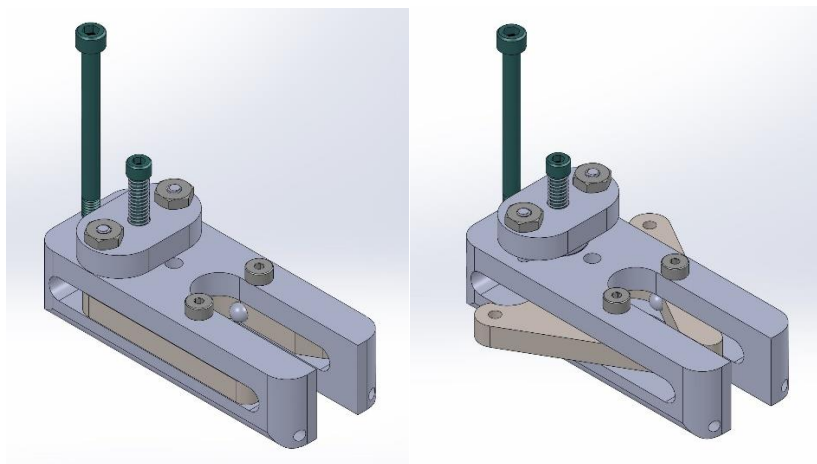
[Left] ball bearing mechanism in “closed” position, [right] ball bearing mechanism in “open” position.
